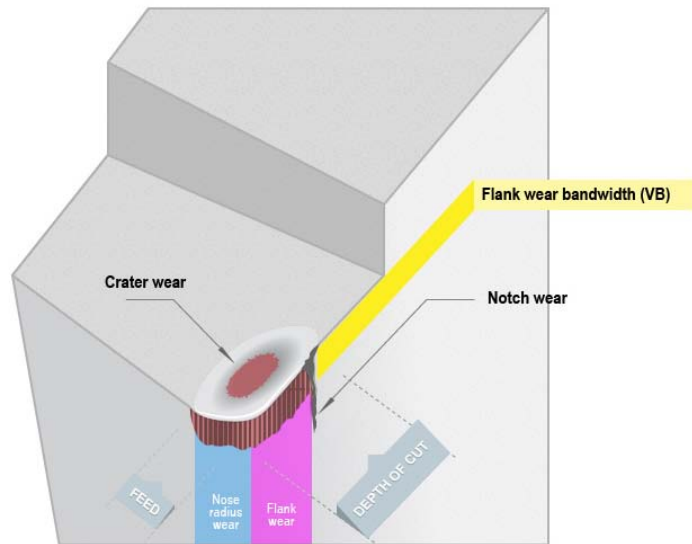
Illustration of the typical types of wear and locations in a worn cutting tool
